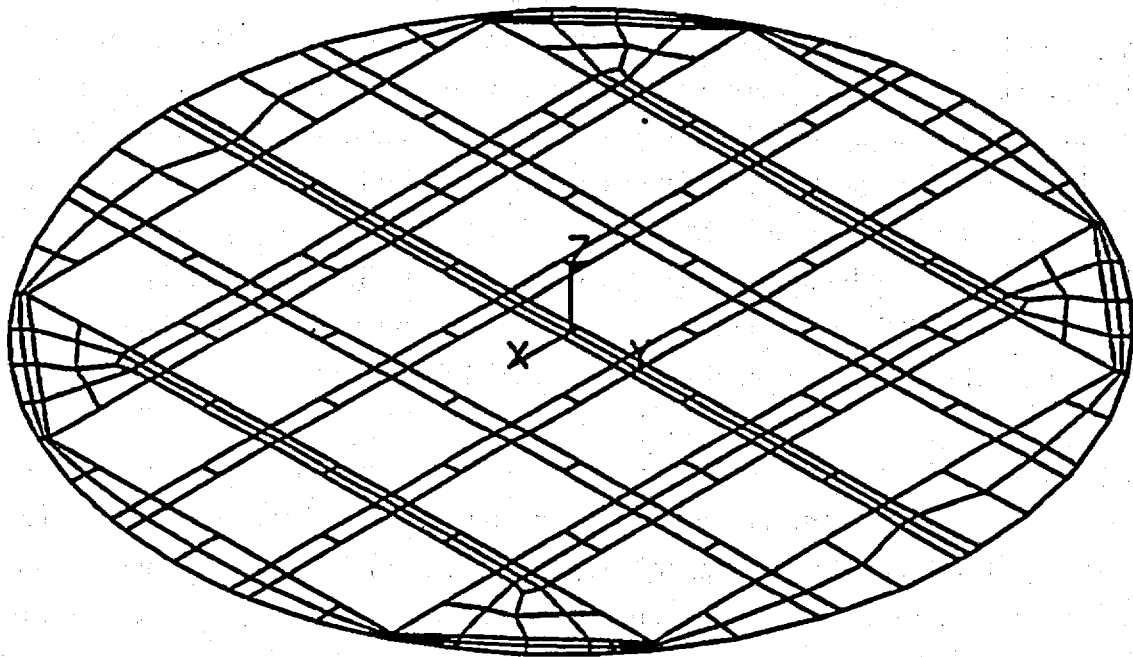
Fuel Basket Top Weldment Boundary Conditions (Directly Loaded Fuel Configuration)
